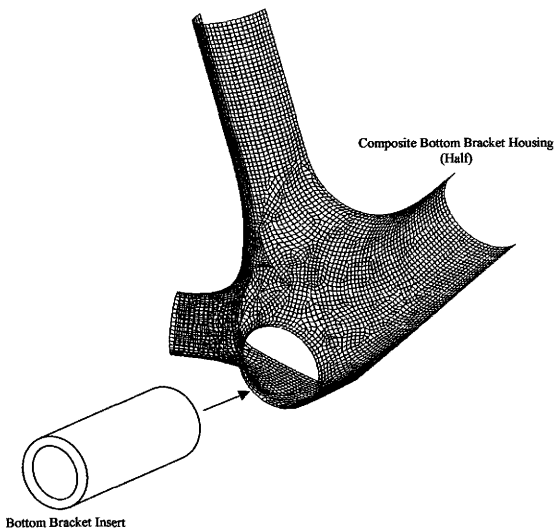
Exploded View Schematic of Bottom Bracket Insert and Composite Frame Half
